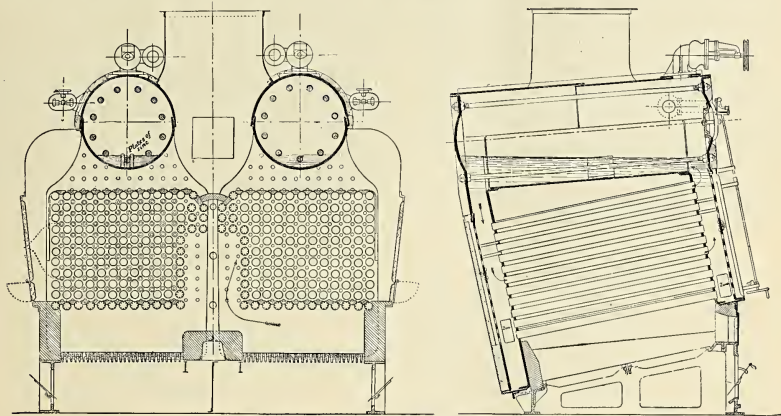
D'ALLEST WATER TUBE BOILER.
